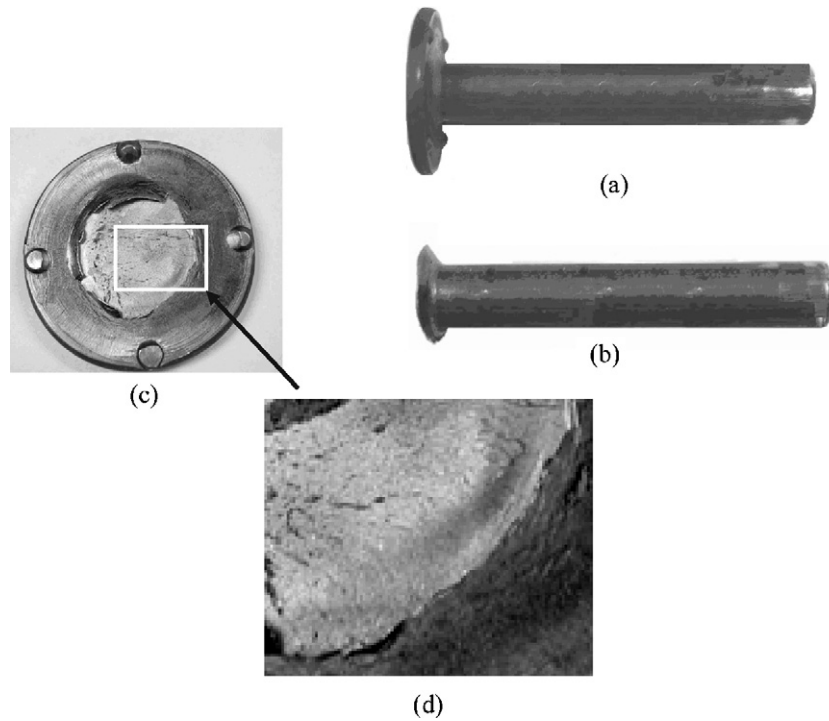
Cold-headed industrial bolt: (a) without defect, using material 1, (b) shank of the defective bolt (material 2), (c) separated industrial bolt head due to an internal crack (material 2), and (d) magnified detail of the ductile crack of the separated industrial bolt head (material 2).
